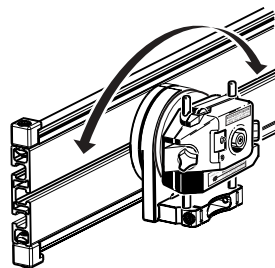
The cardan bracket with the laser holder assembly including the laser.
